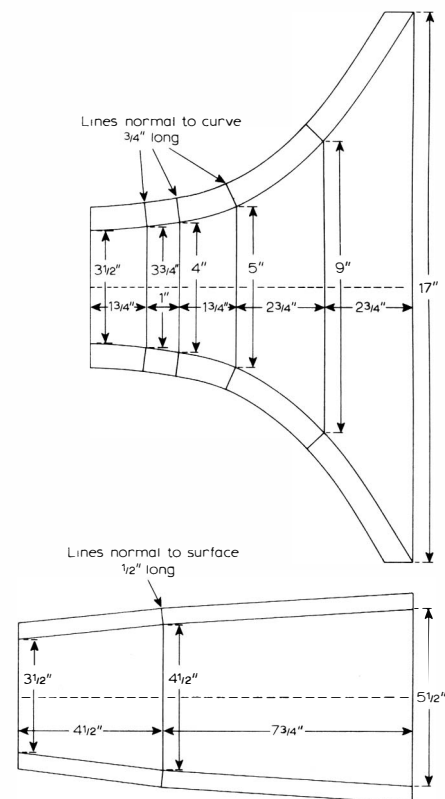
Dimensions of templates for constructing treble horn cardboard mould.
